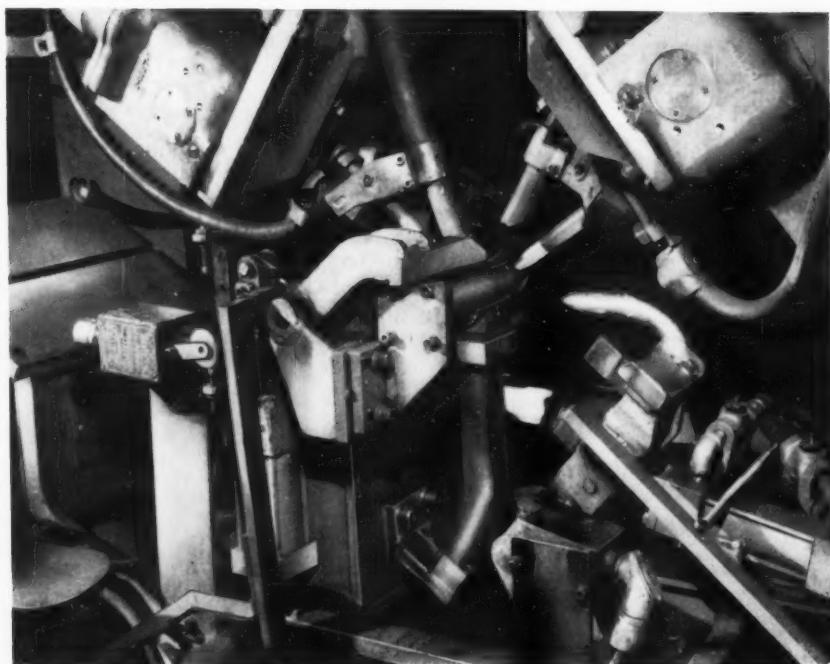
(Above) This machine makes the two straight-line submerged-arc welds along the manifold's oblong flange. Elevator at left returns flux to hopper.
